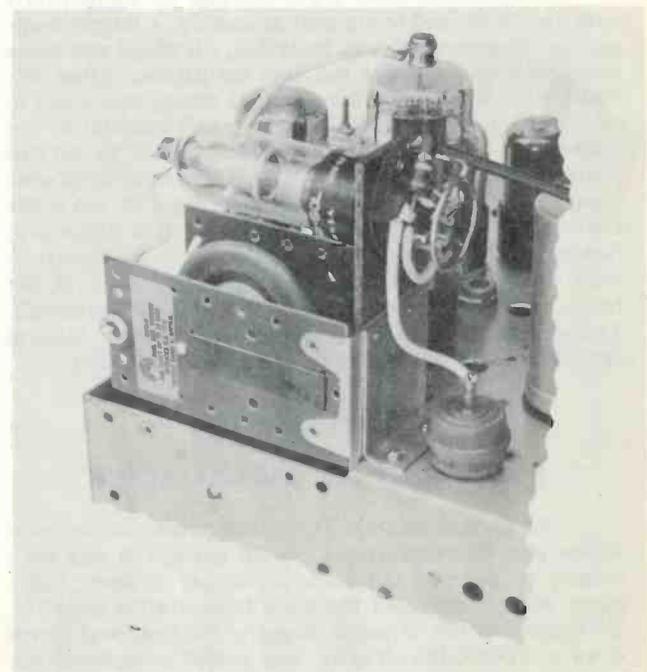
Mounting Detail of HV Rectifier and Horizontal Transformer.
